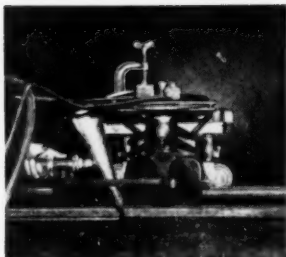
Welding outside vertical seam with "Manual Lincolnweld" gun mounted on simple rail fixture. Welding speeds are from 2 to 4 times faster than conventional hand welding.
